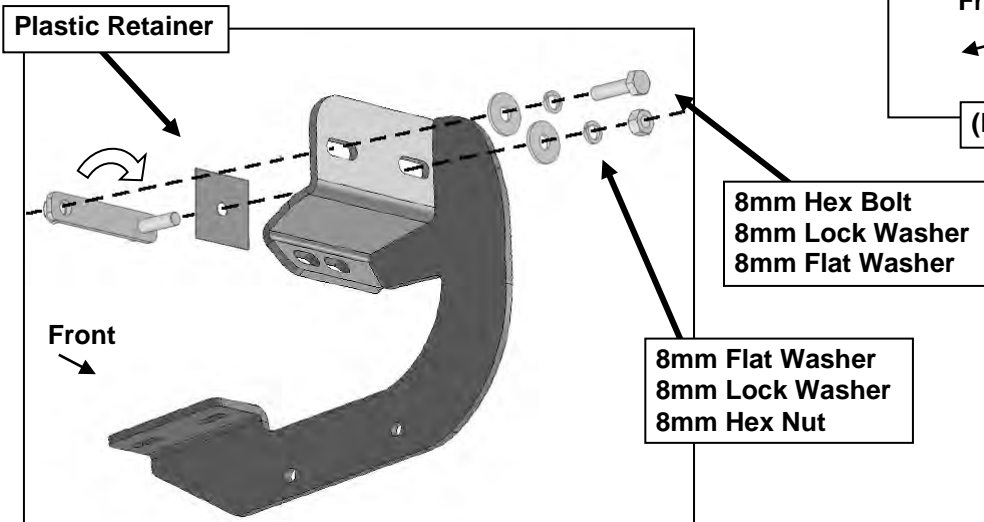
Use the loose Hex Bolt as a handle. Insert the Bolt Plate into the oval hole and feed the threaded end out either factory hex shaped hole. IMPORTANT: Do not let go of the hex bolt until after Plastic Retainer has been threaded onto bolt (Fig 5)
